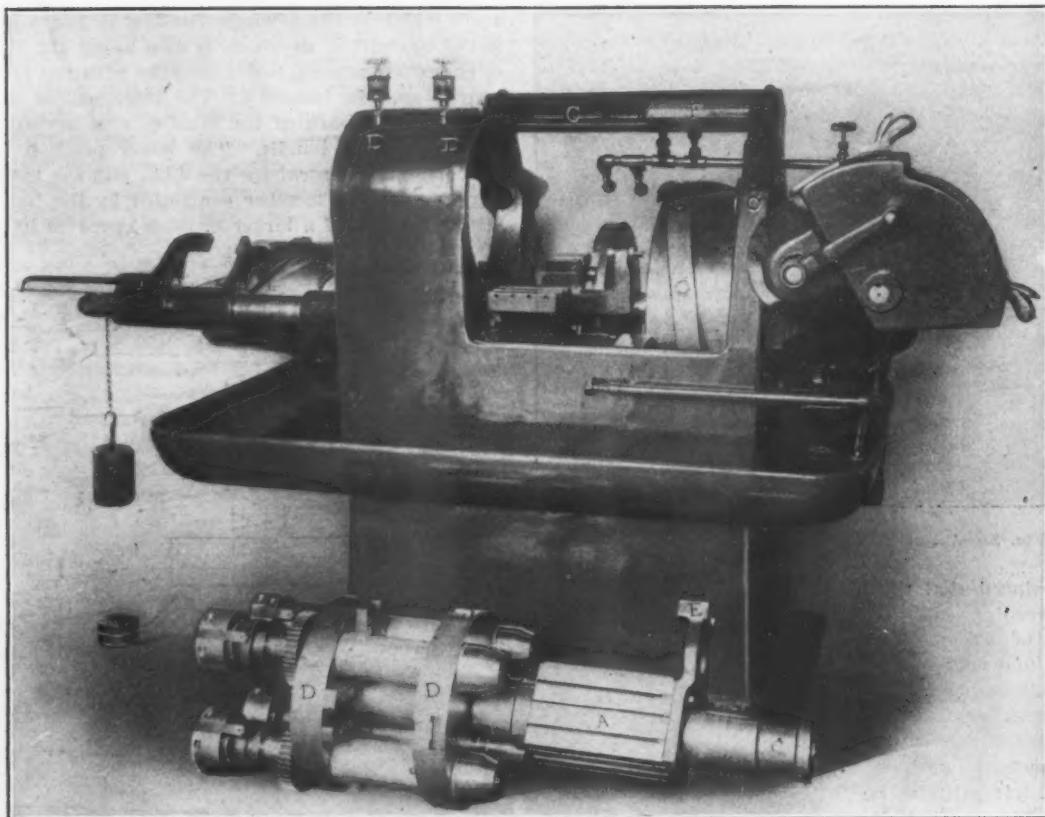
The Machine with the Revolving Turret and the Stationary Tool Slide Removed.
